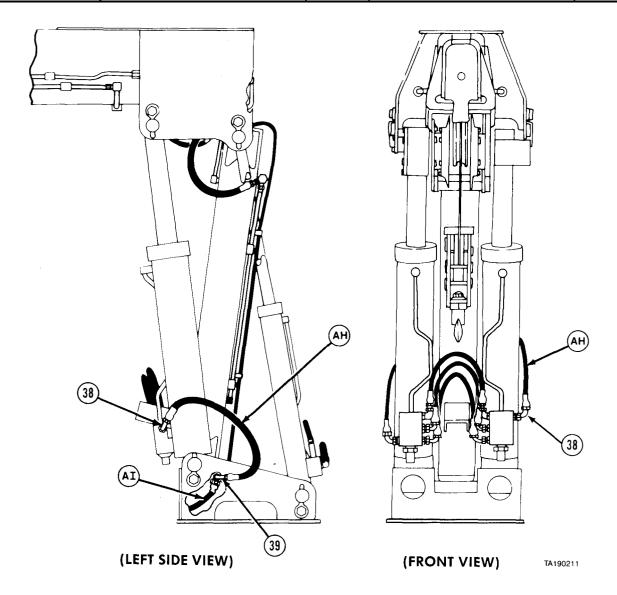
Boom Cylinders, Hoses, and Tubes.
